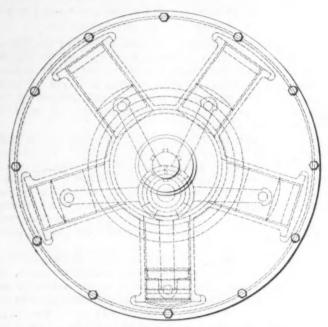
FIVE-CYLINDER HYDRAULIC MOTOR OR PUMP
